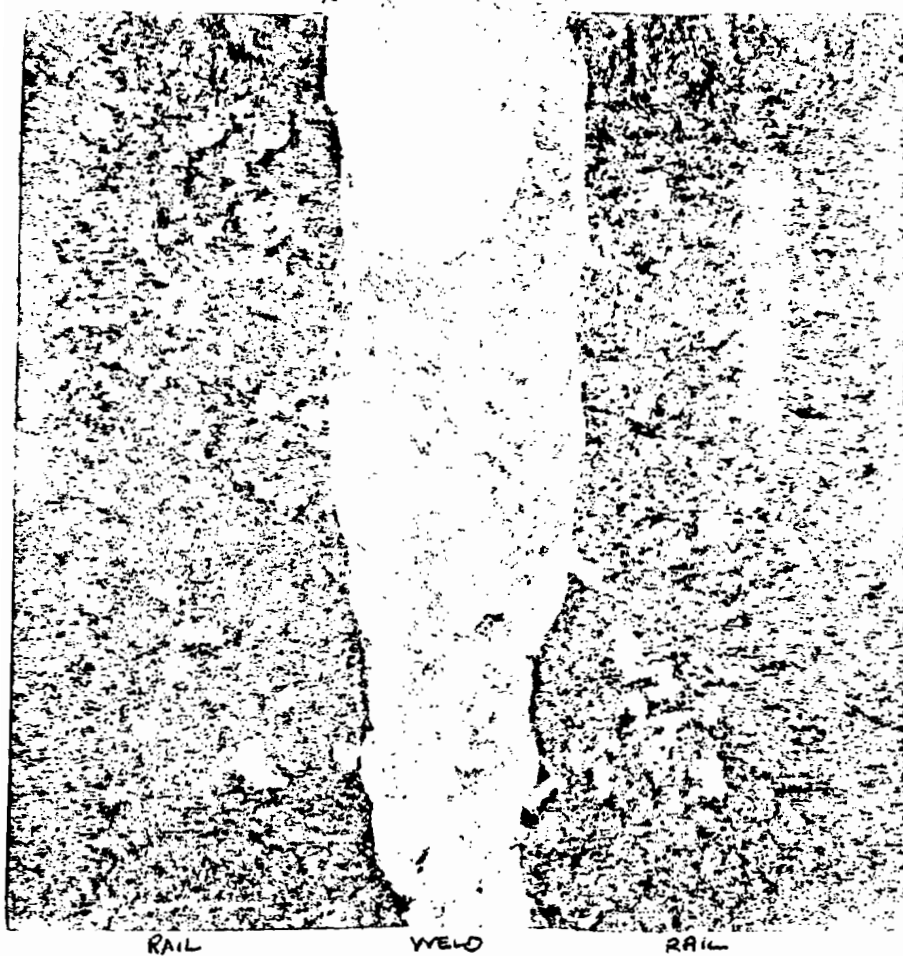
SULFUR PRINT OF ELECTROSLAG RAIL WELD.
